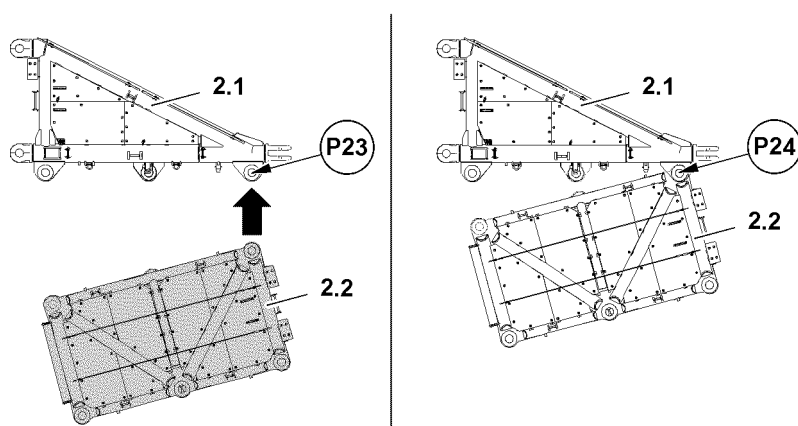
Preassembling the P-adapter — positioning the center lattice section
